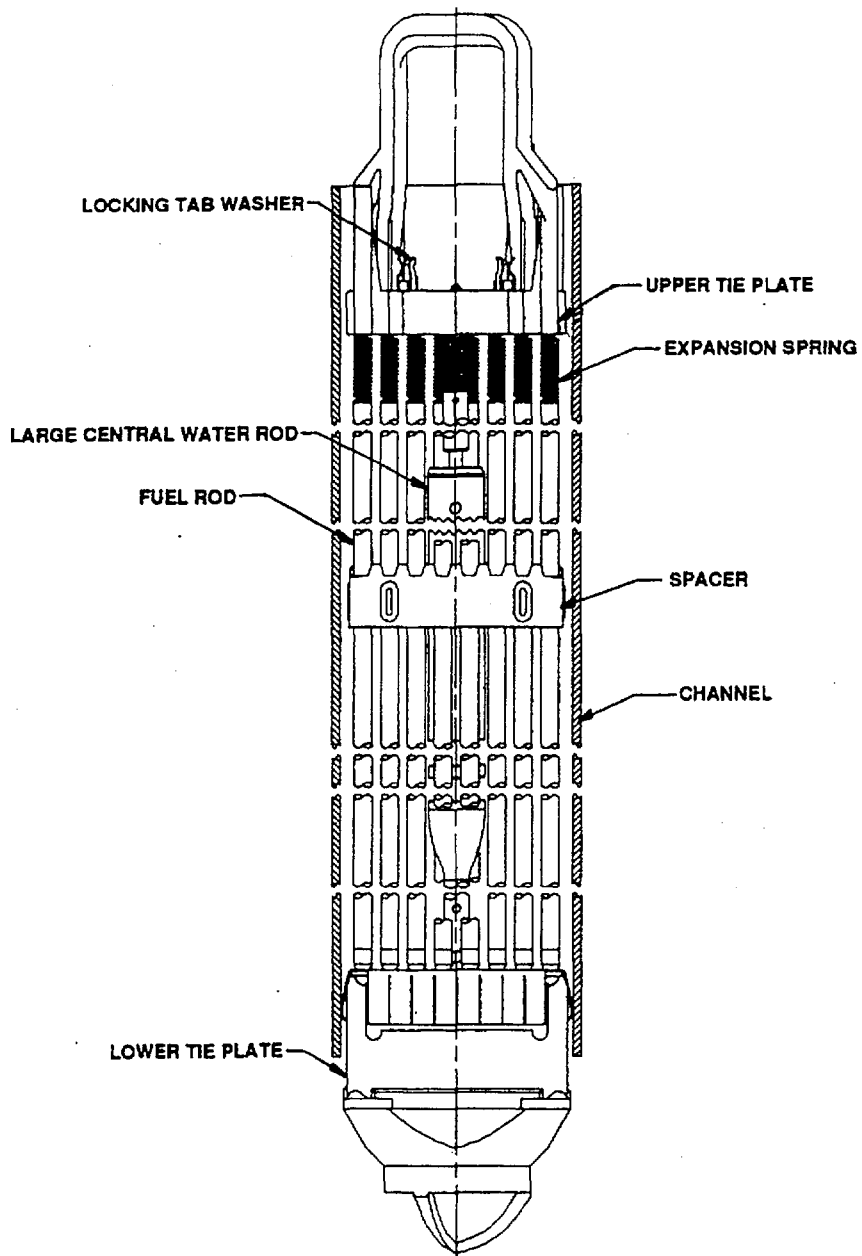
LS1 GE 8x8NB Fuel Assembly
